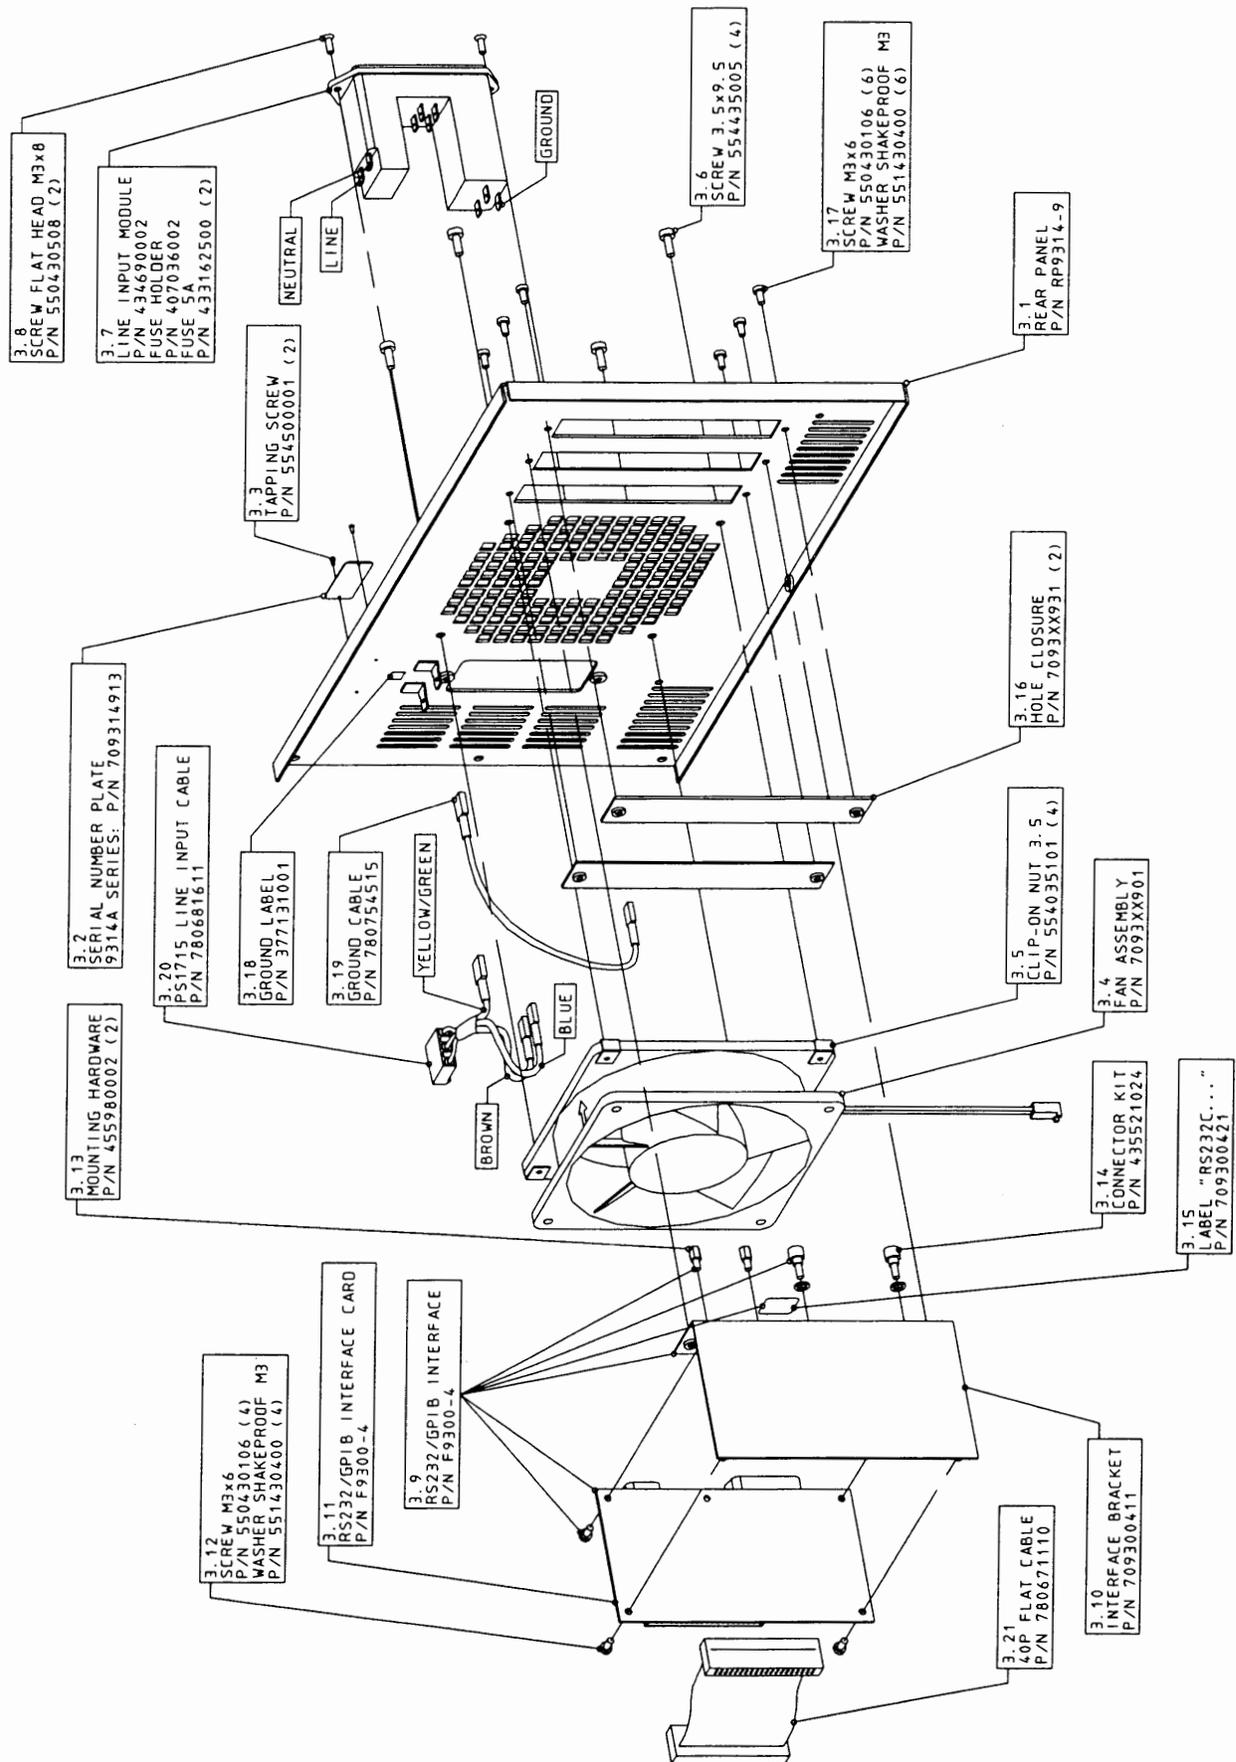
9314A/M/L Rear Panel Assembly (ECO 1001)
